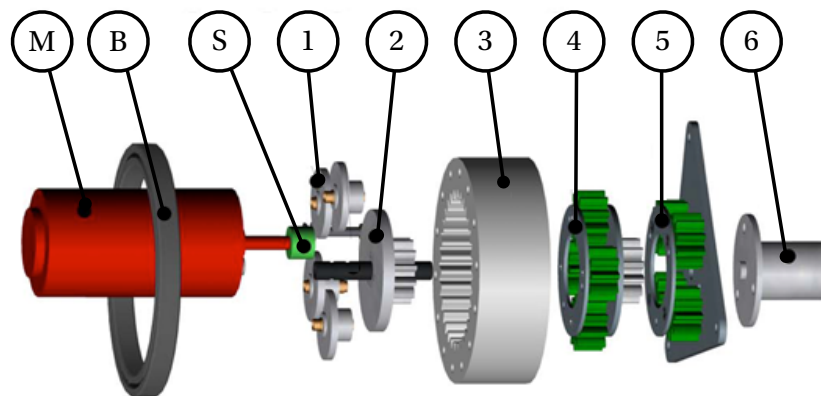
Exploded view of the Gearbox A design. A DC brushed motor (M) drives a first drive chain of spur gears (S-1-2). A two-stage planetary gear train (3-4-5) further increases the reduction ratio. An internal hollow axis allows electrical slip ring wires (6) to pass through the gearbox. A thin-section ball bearing (B) guarantees smooth motion. Image adapted from [200].
